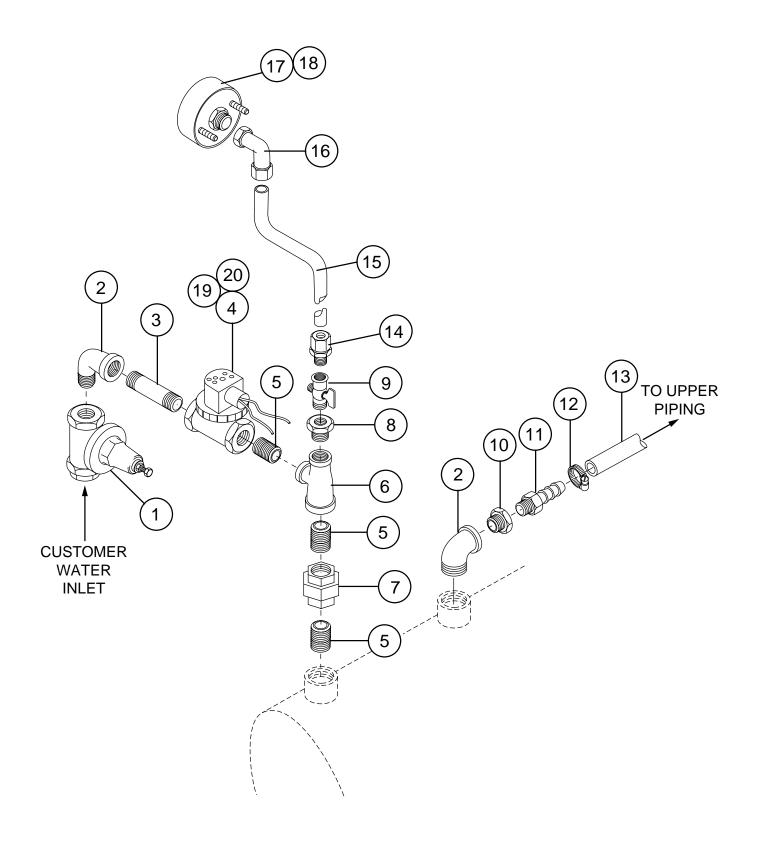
MH-60 Only Lower Fill Piping Assembly
